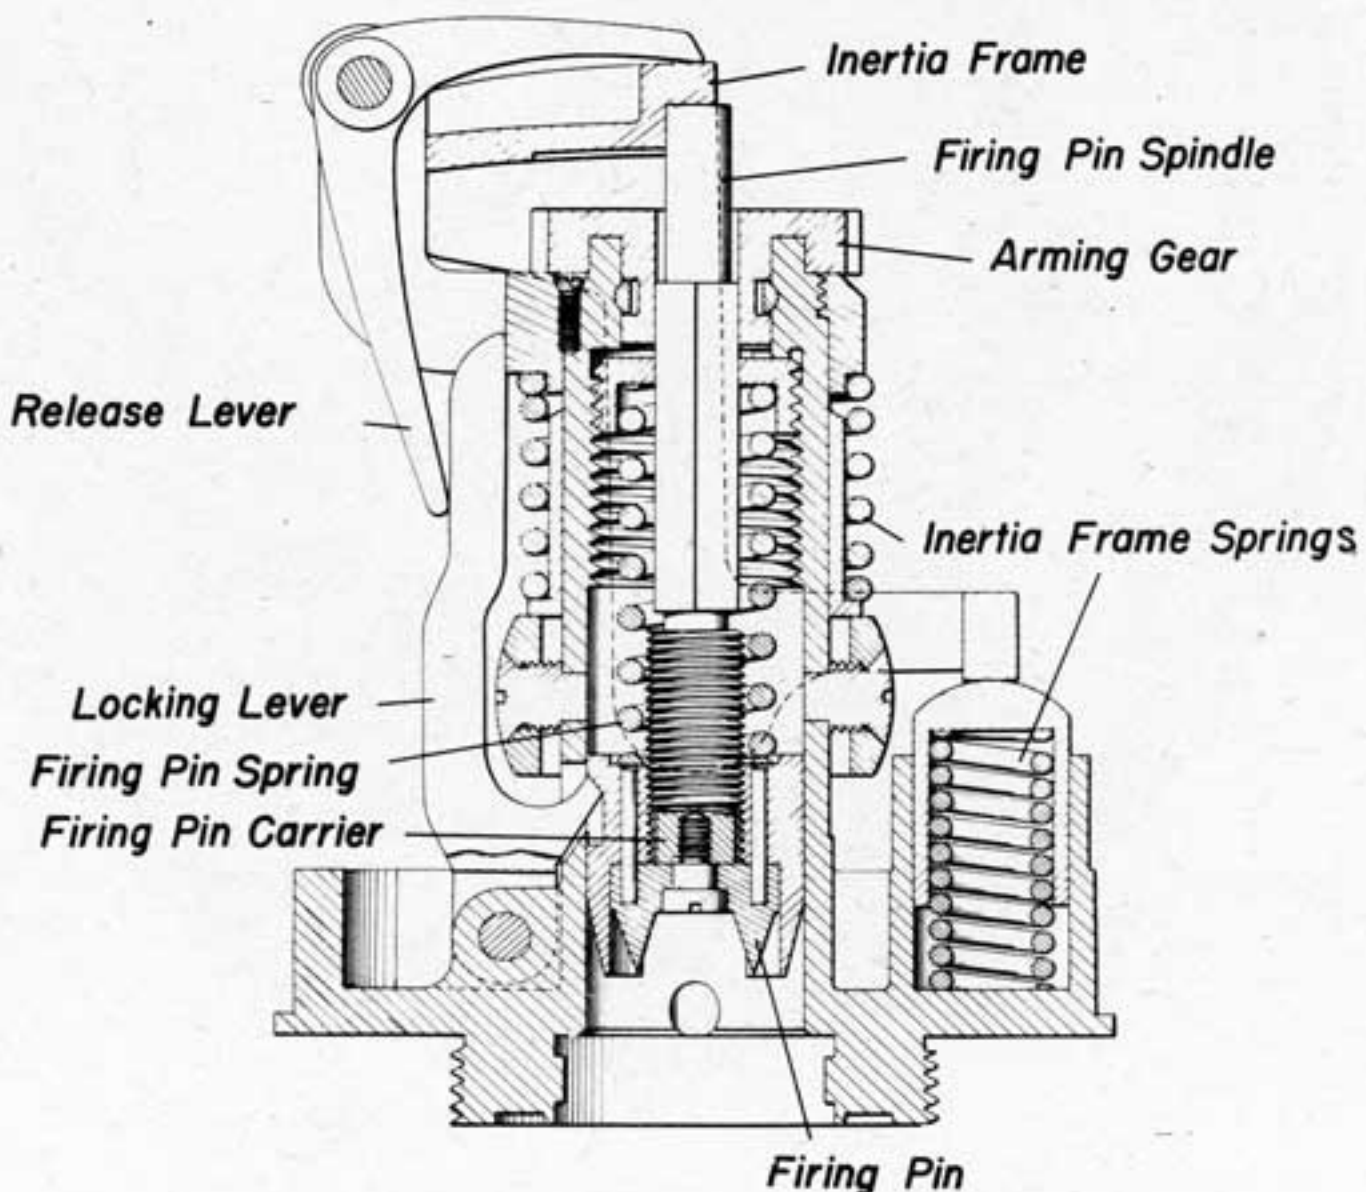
Italian Standard Exploder, Unarmed Position, Sectional View
